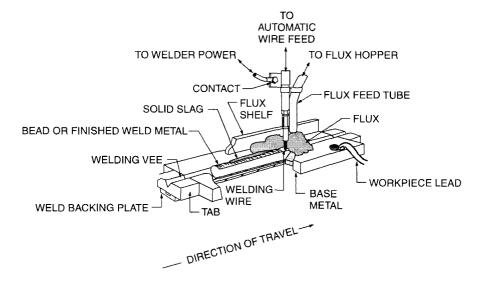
Schematic View of Submerged Arc Welding Processes
